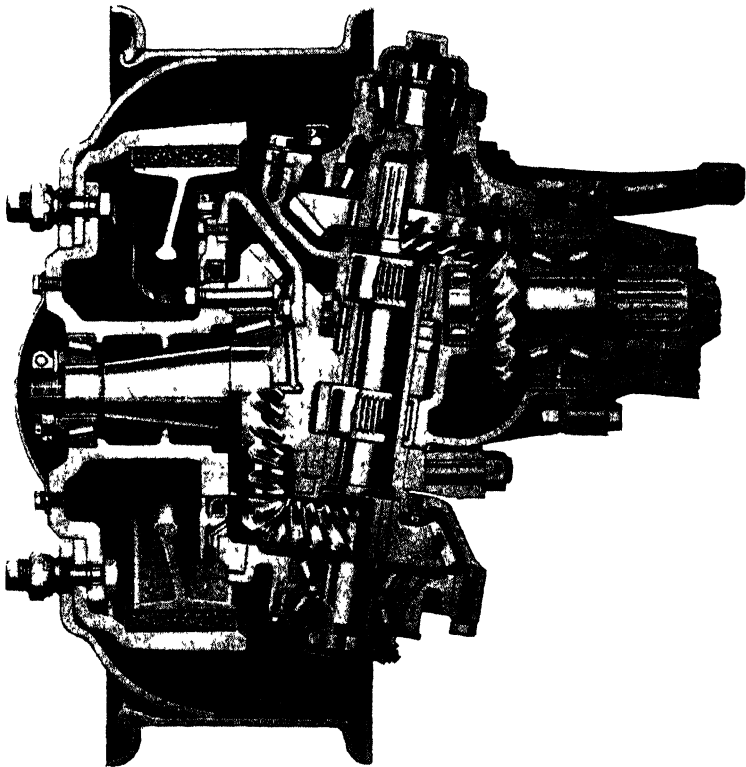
MACK FRONT-WHEEL DRIVE THROUGH BEVEL GEARS.
